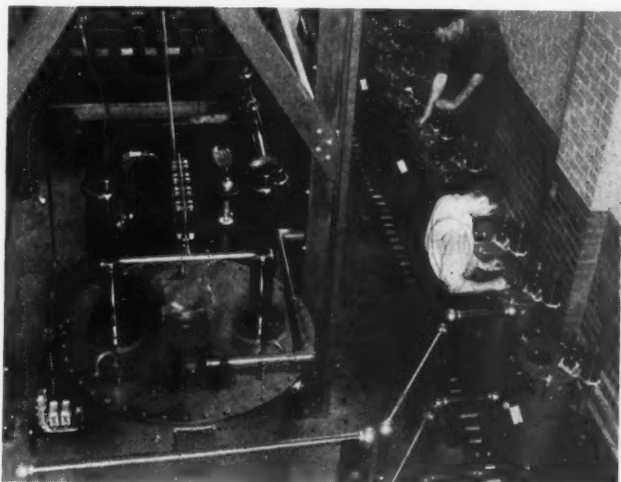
Line of distribution transformers moving on conveyor from manufacturing department to lightning surge test chamber. At left is end view of new lightning machine for putting Jupiter's bolts to work.
